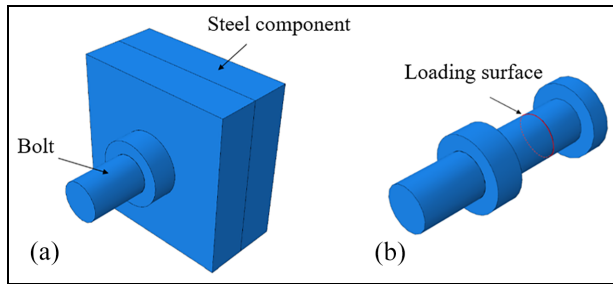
Bolt model in Abaqus: (a) bolt and steel components and (b) bolt loading surface.
